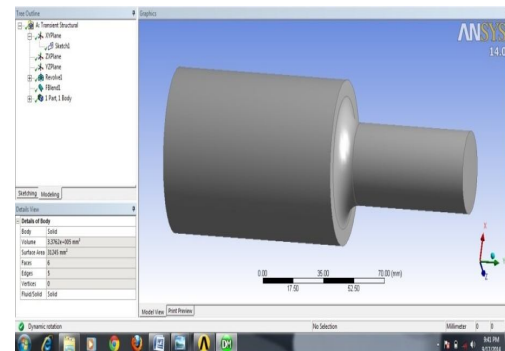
Revolving The Sketch To Generate Stepped Shaft
